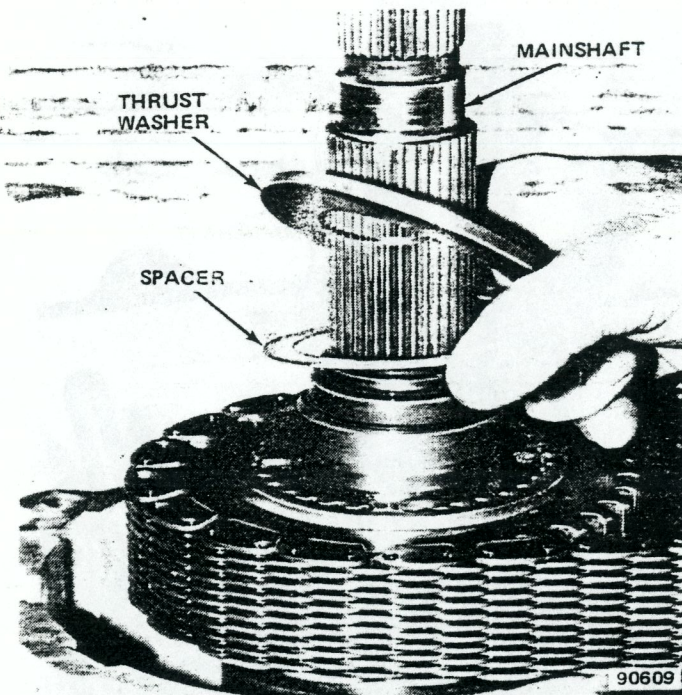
D-14 Drive Sprocket Thrust Washer and Spacer Removal/Installation
